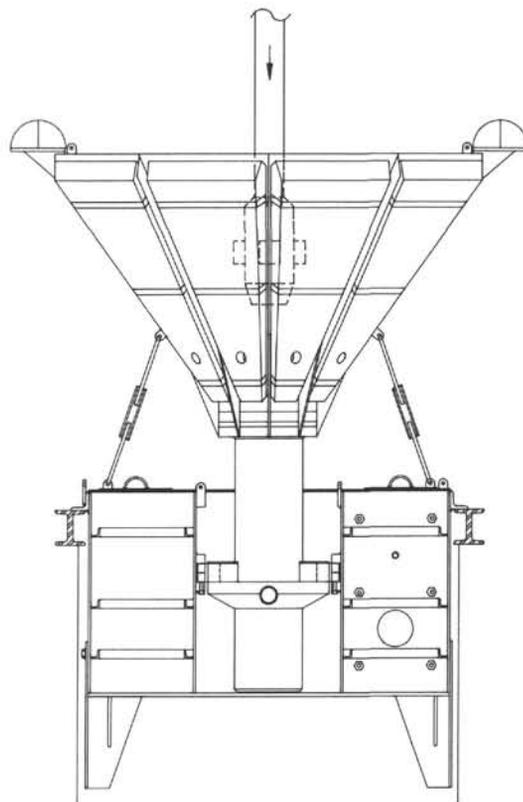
Running tool entering HRB. Lowering jay running tool into HRB and jay-in.
